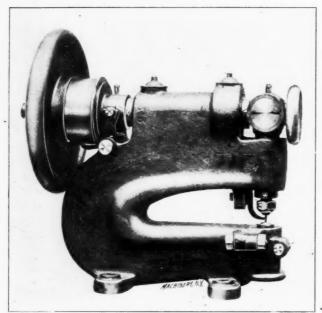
Machine for Rapidly Blanking out Special Irregular Shapes in Sheet Metal. Size from Punch to Throat, 12 Inches.
